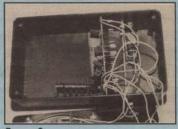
View showing the boards inserted into the box, using the side mounting rails inside the box.
